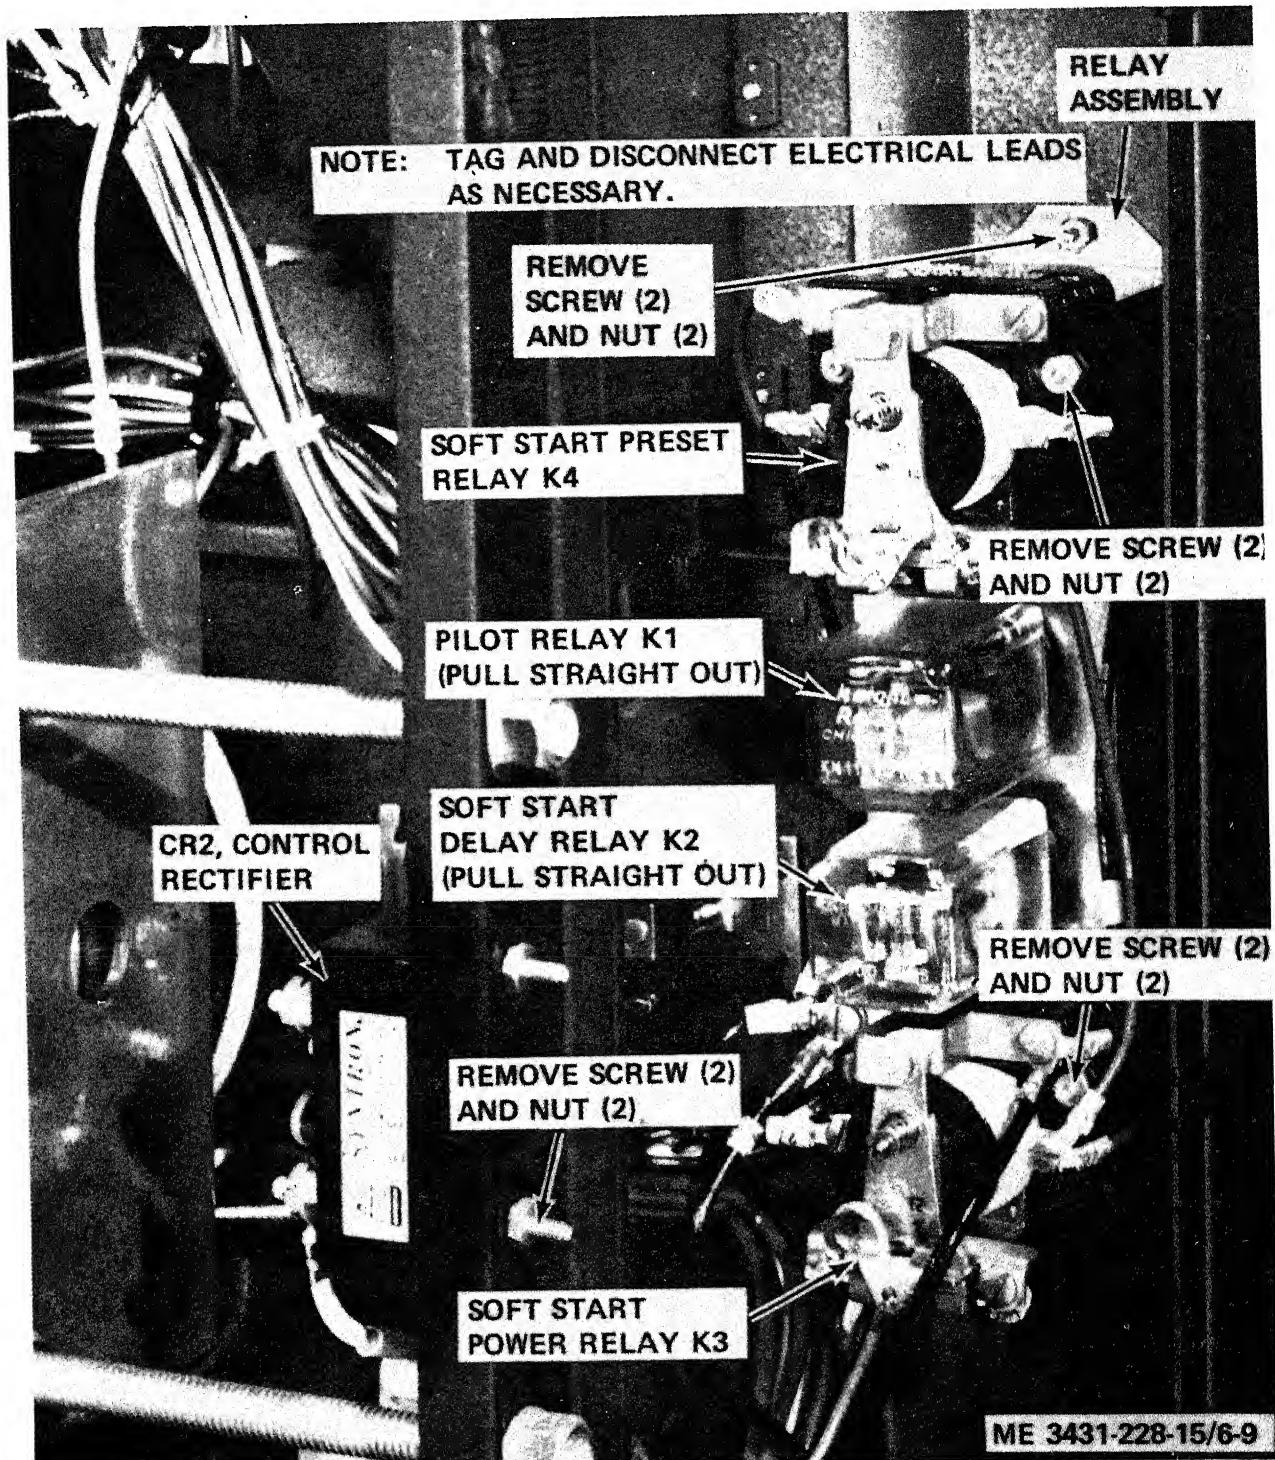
Relays K1, 2, K3, K4, control rectifier CR2, and relay assembly, removal and installation.
